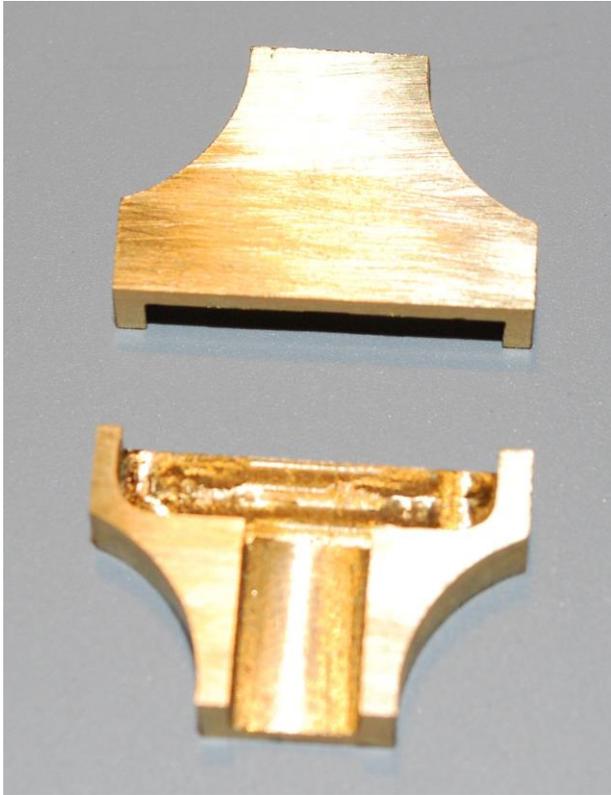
The finished connectors. The back is milled out where the steel sections will be soldered.
